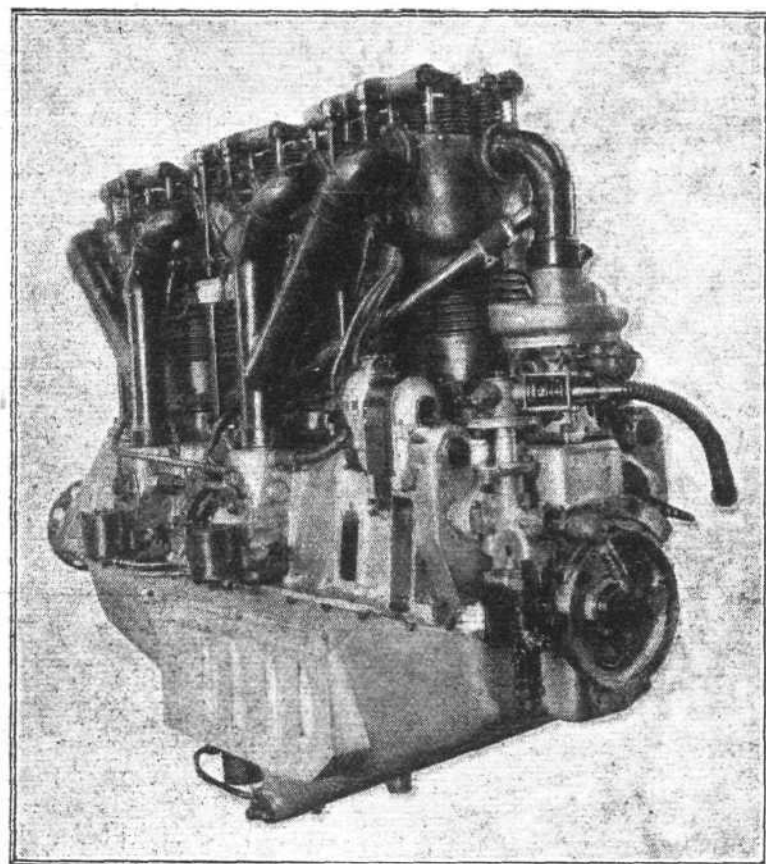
Rear end view of engine showing petrol pump driven off end of inlet camshaft.
